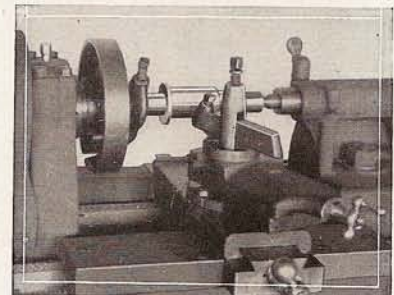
Machining a Steel Sleeve Held on a Mandrel Between Lathe Centers.
